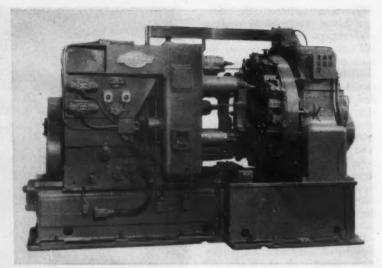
Greenlee twelve-station special machine for processing oil-pump bodies
